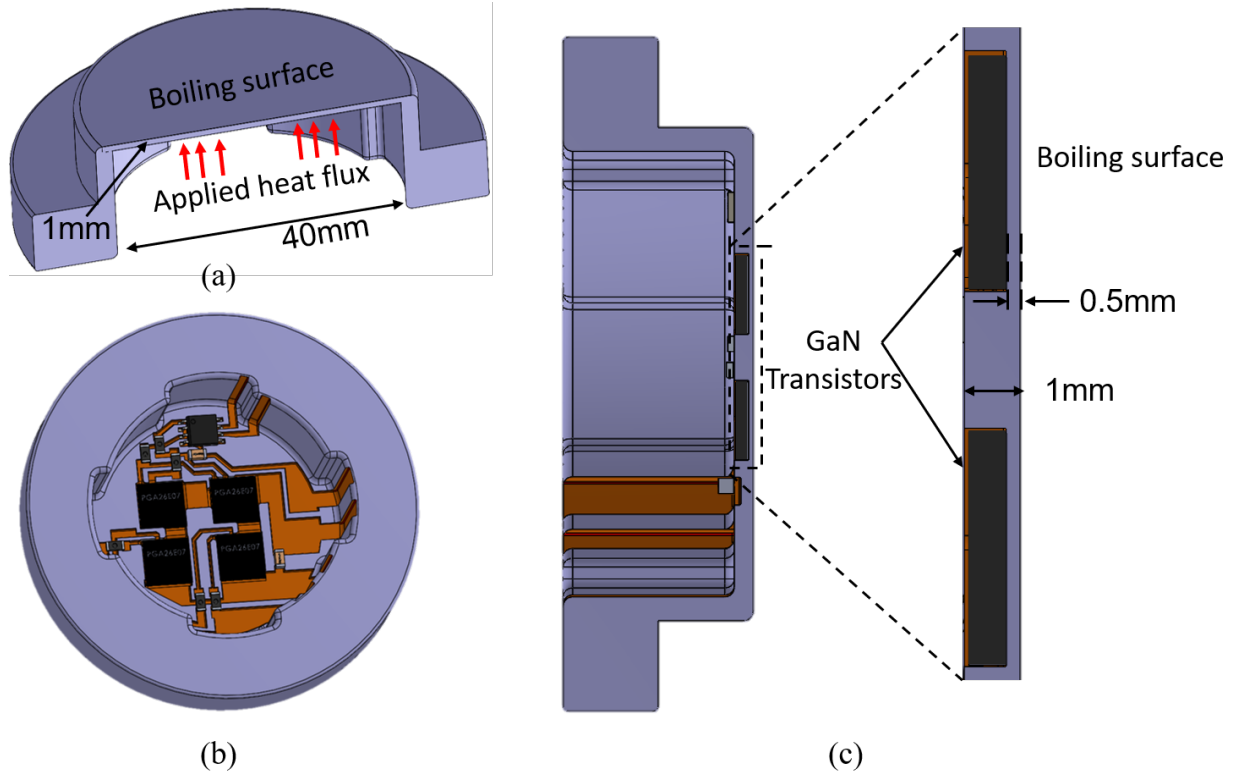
Design structure details of the 3D printed and copper metallized evaporator: (a) isometric section view, (b) bottom view, (c) cross section view.
